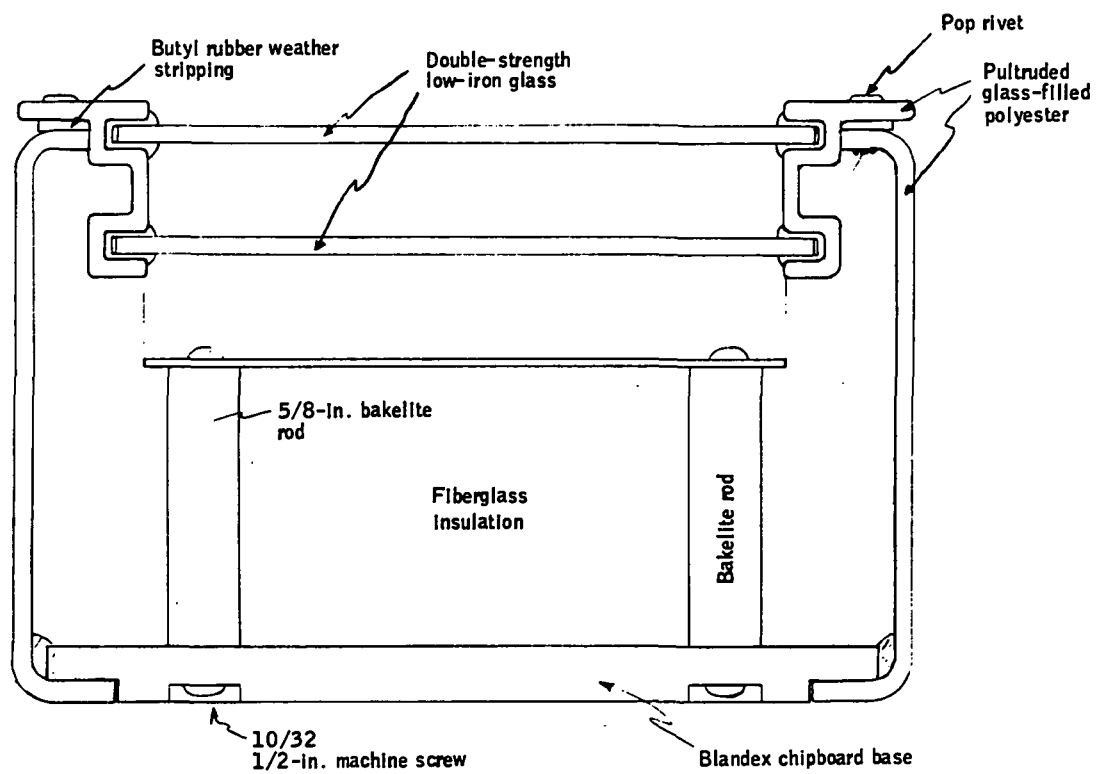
Design III. - Pultruded Plastic Box and Cover Frame with Chipboard Bottom
